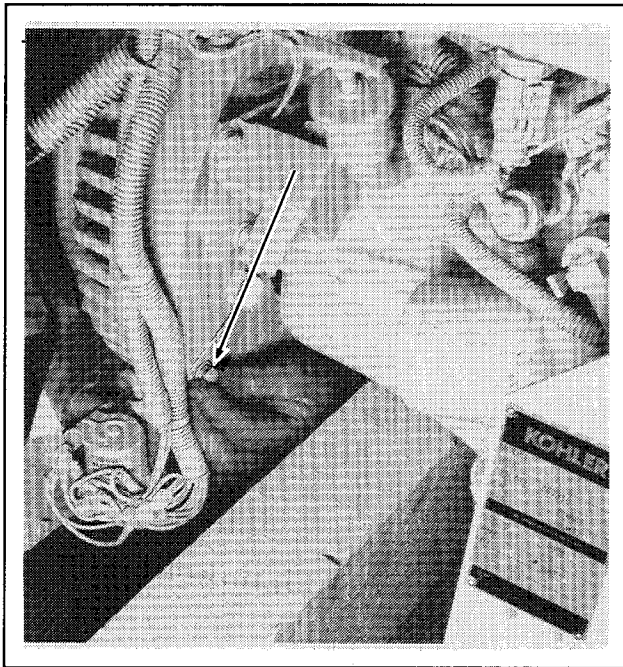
Removing End Bracket (CC/4-Lead Generator Shown)
